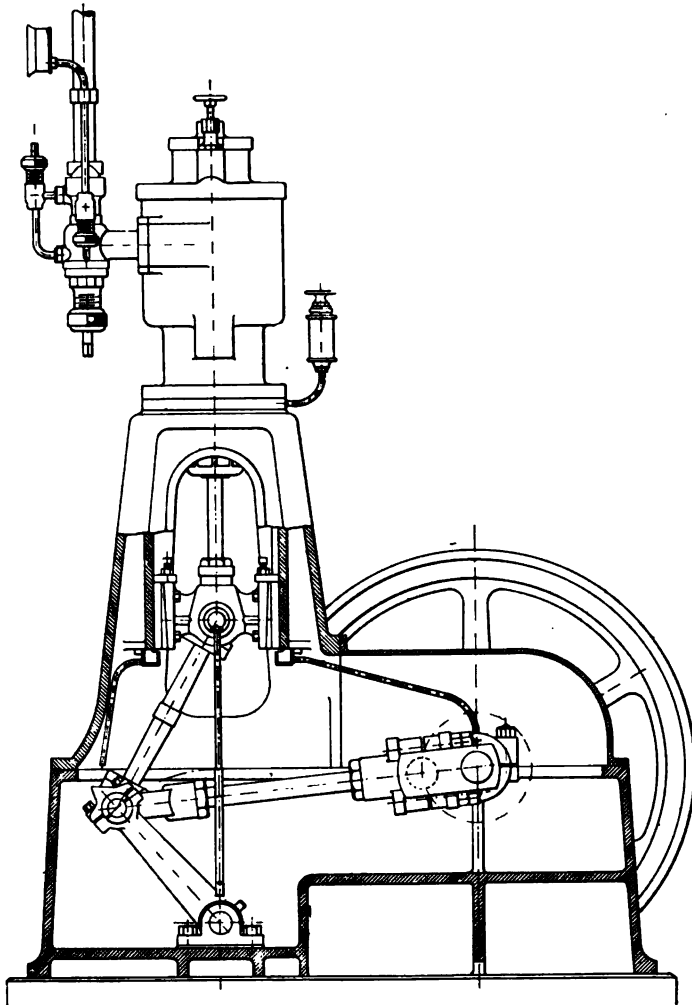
SECTION OF IDEAL REFRIGERATING AND MANUFACTURING CO.'S MACHINE, CHICAGO, U. S. A.
